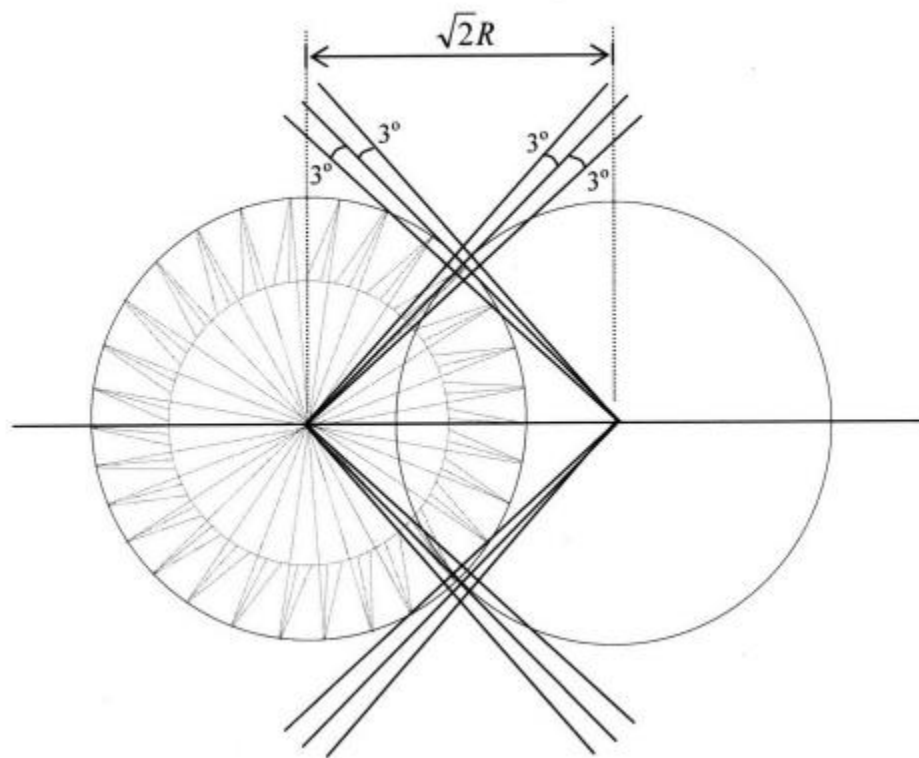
Construction lines for drawing the pallet. (Hill F. A., 2008)
